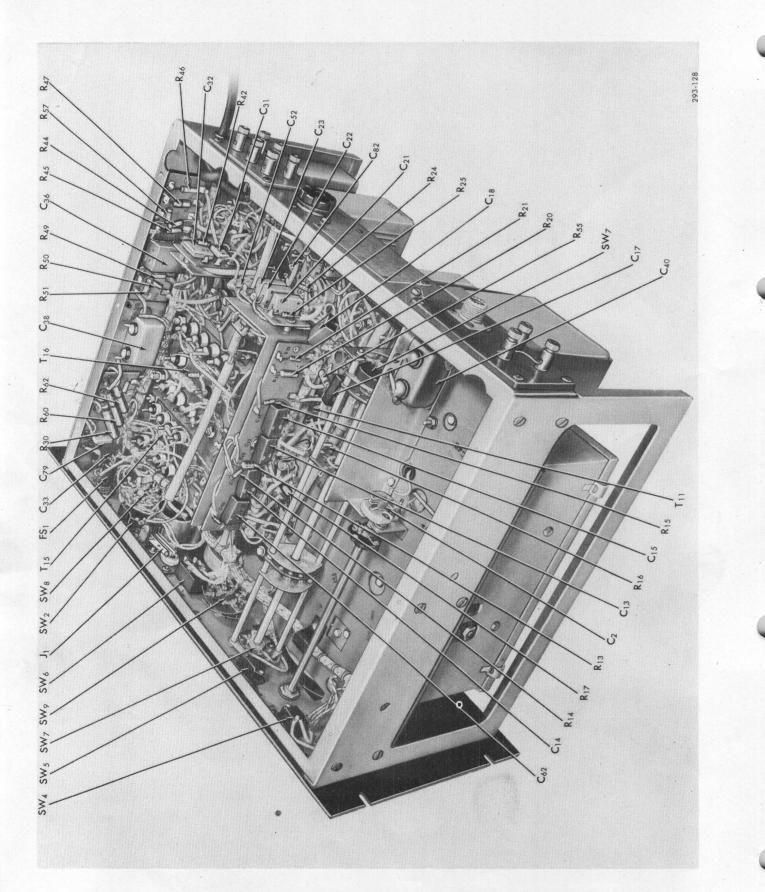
Bottom View of Receiver Chassis Looking Toward Front.
